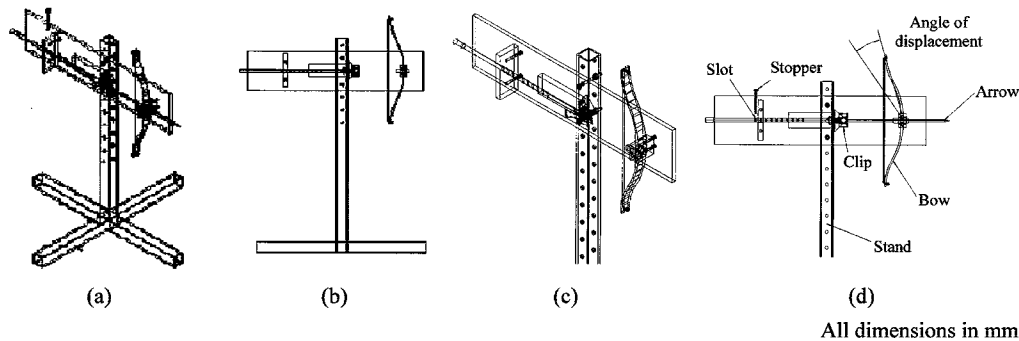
a) Isometric view of the experimental setup for bow testing, b: Side view of the experimental setup for bow testing, c) Detail isometric view of the experimental setup, d) Detail side view of the experimental setup
